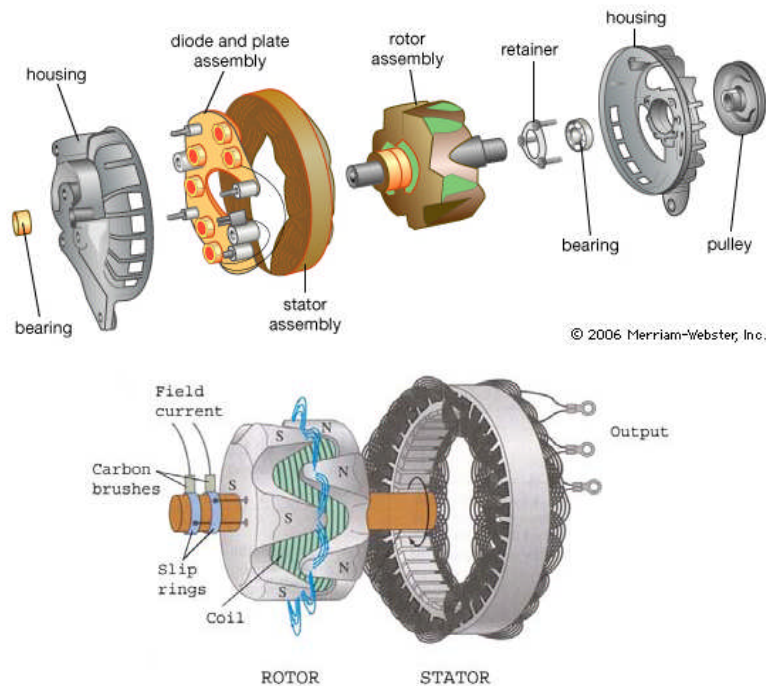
Exploded view of the Basic anatomy of an alternator
